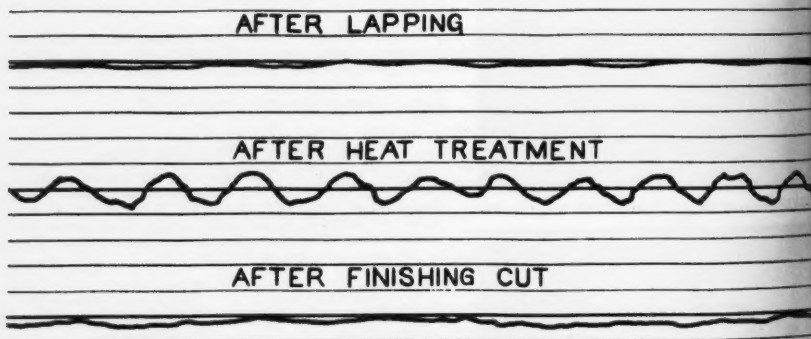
Charts of a helical gear after cutting, after hardening, and after lapping.
